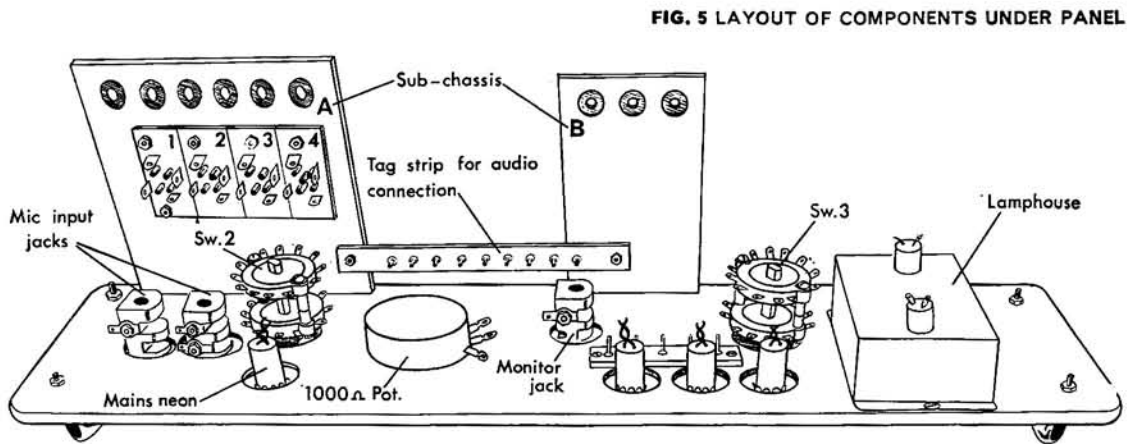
LAYOUT OF COMPONENTS UNDER PANEL
